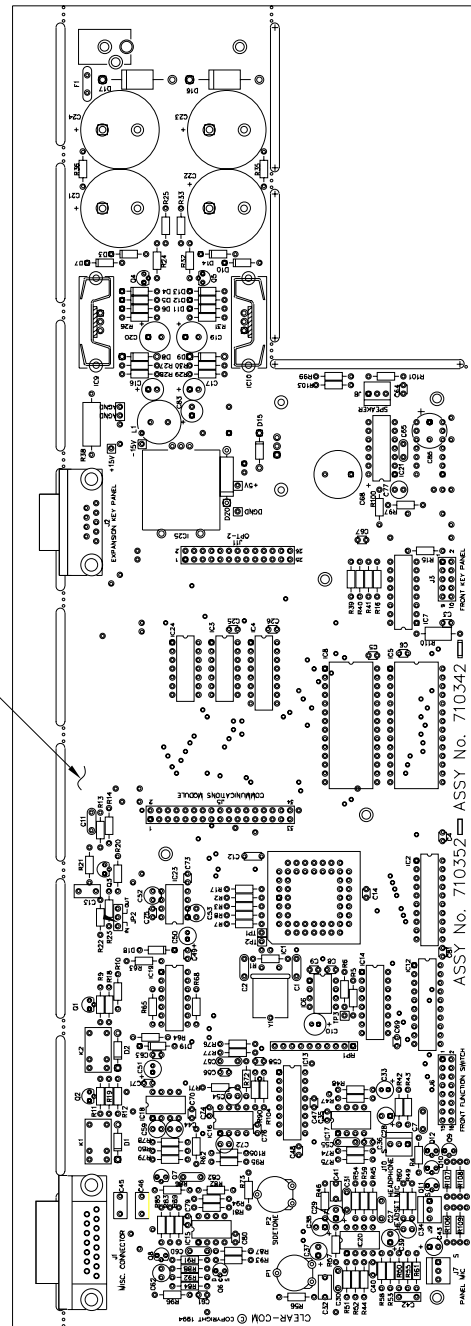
Assembly Drawing—ICS-1016/ICS-1008 Main PCB Rev. A
